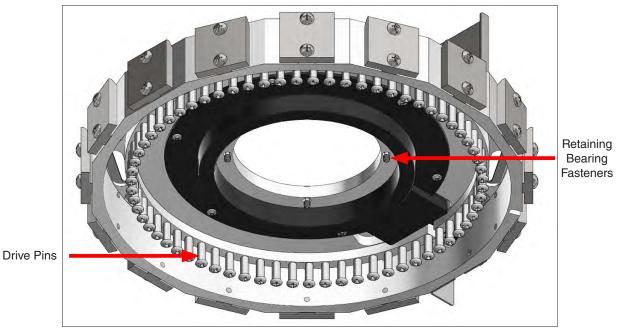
Turntable bottom view showing drive pins and retaining bearing fasteners.
